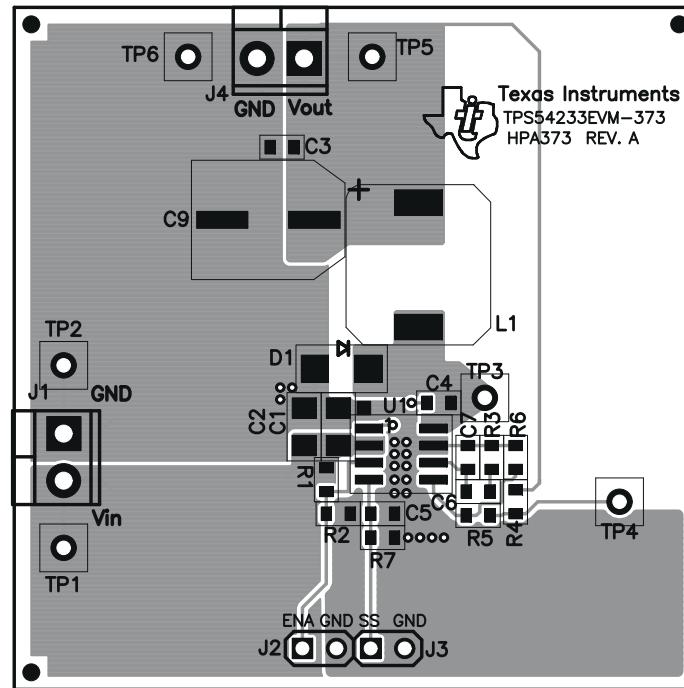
TPS54233EVM-373 Top-Side Assembly
